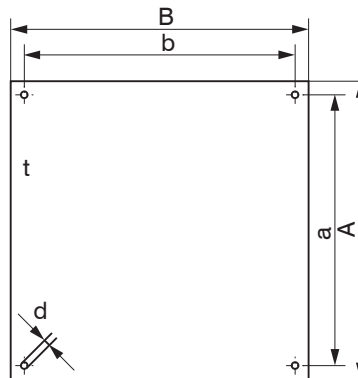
Dimensional drawing reflector, dimensions in mm, not to scale
